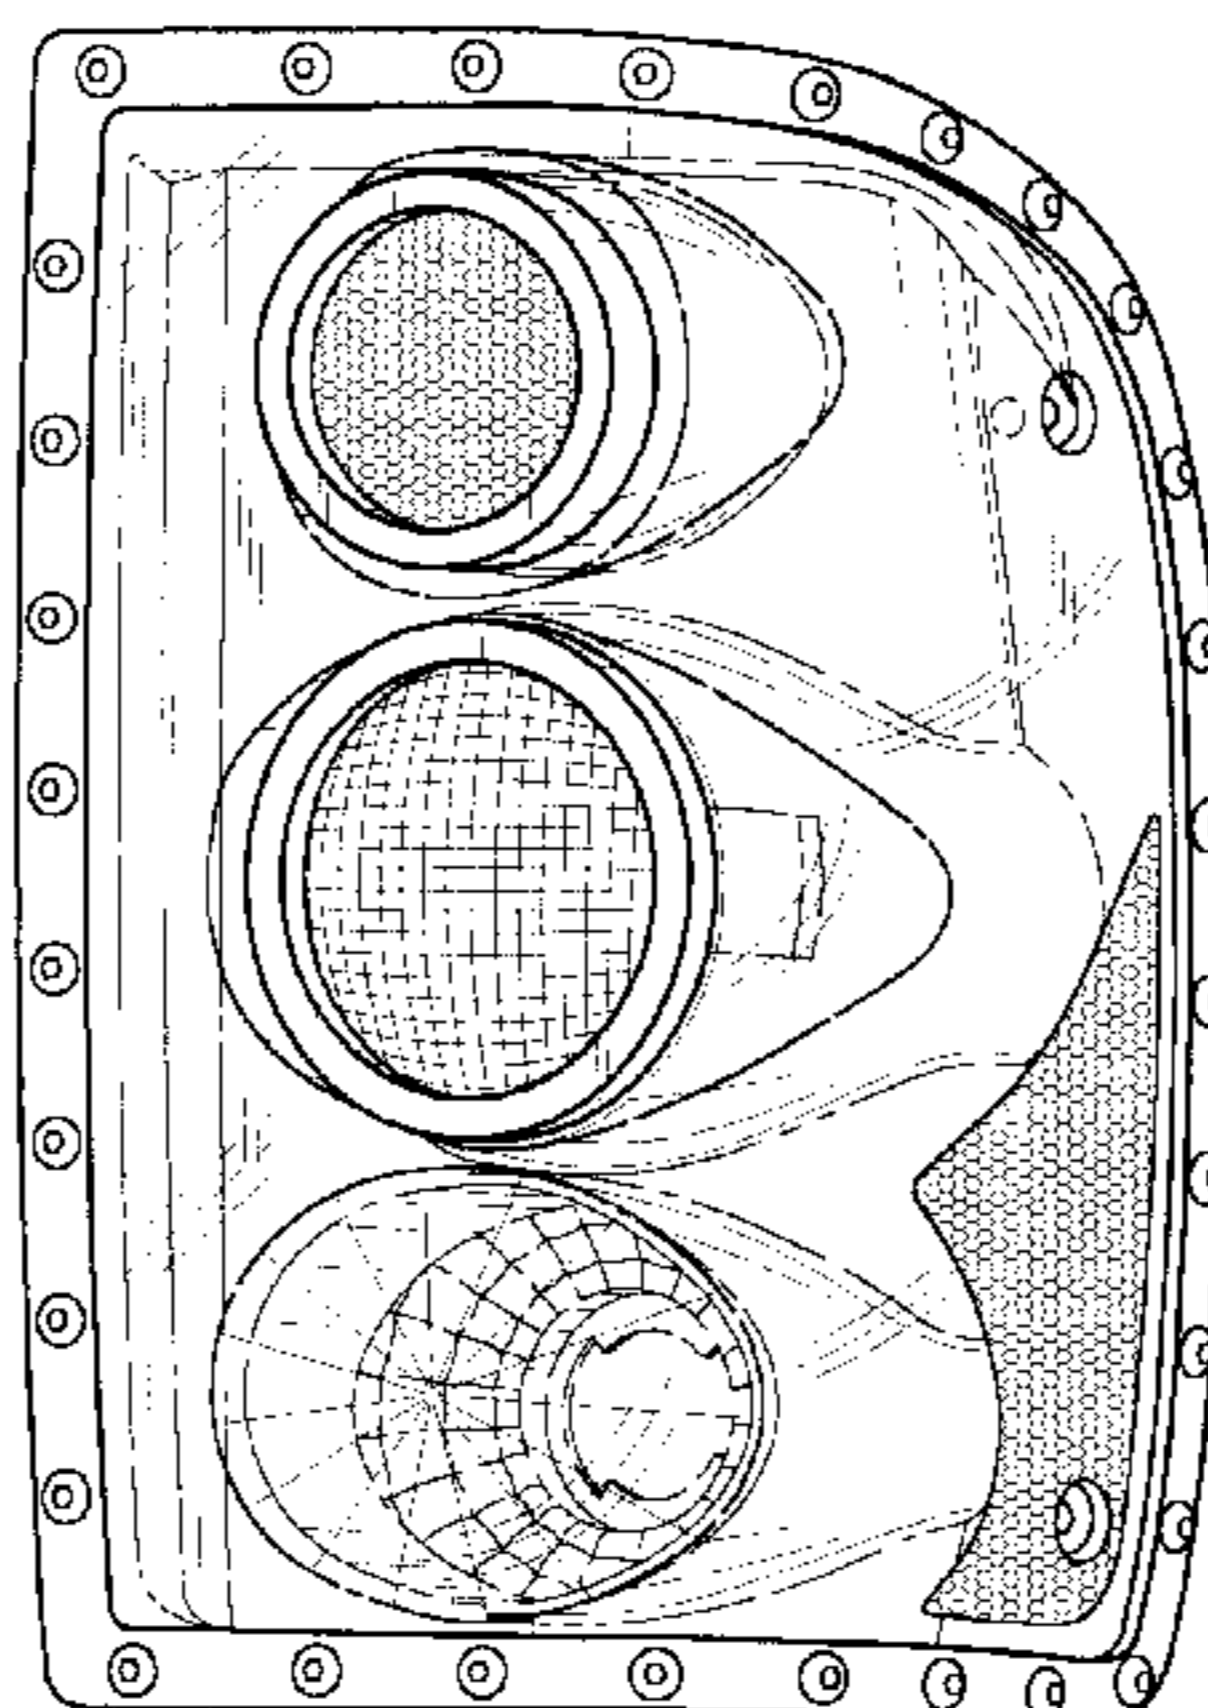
is a top plan view of the tail lens assembly of FIG. 2;
